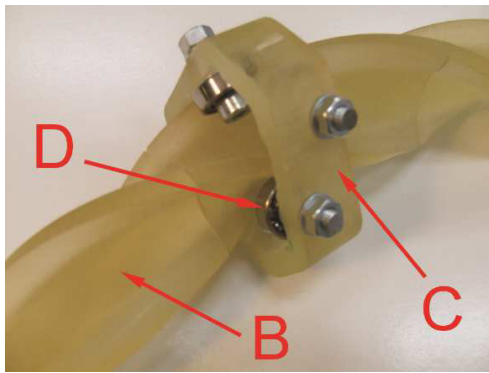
Curvilinear screw and lobed ring with bearings printed with a 3D printer.
